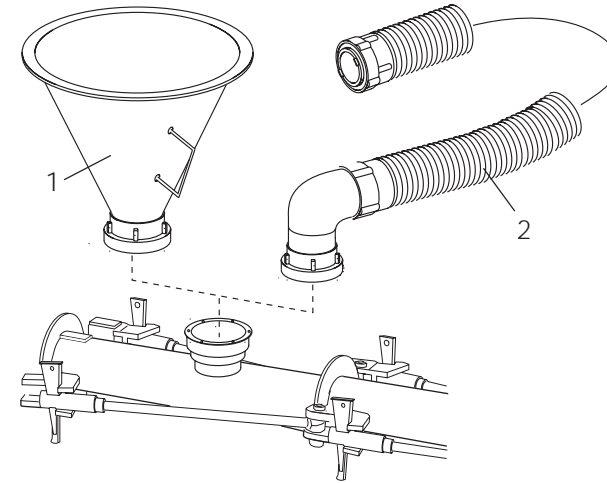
Extruder with filling funnel or 2" hose with C couplings.
